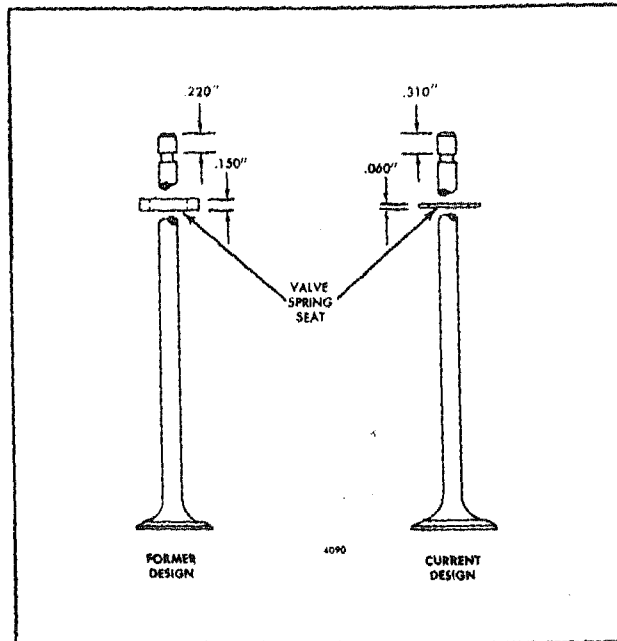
Former and Current Design Exhaust Valves (Four Valve Head)
